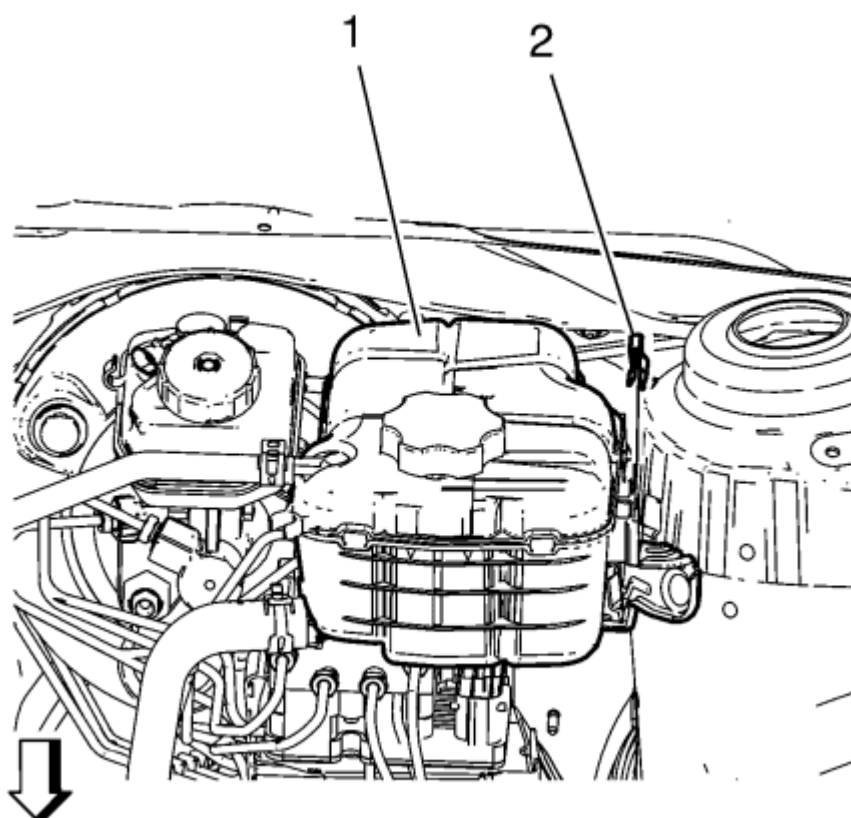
View Of Radiator Surge Tank And Radiator Surge Tank Clip
